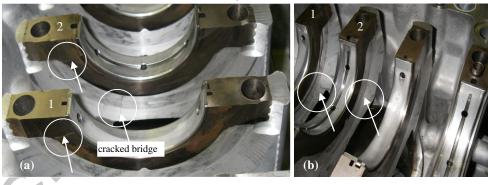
(a) Steel shells based on the bedplate bridges the white arrows showing the found cracks; (b) the aluminium bridge cracks under the support steel shells.
